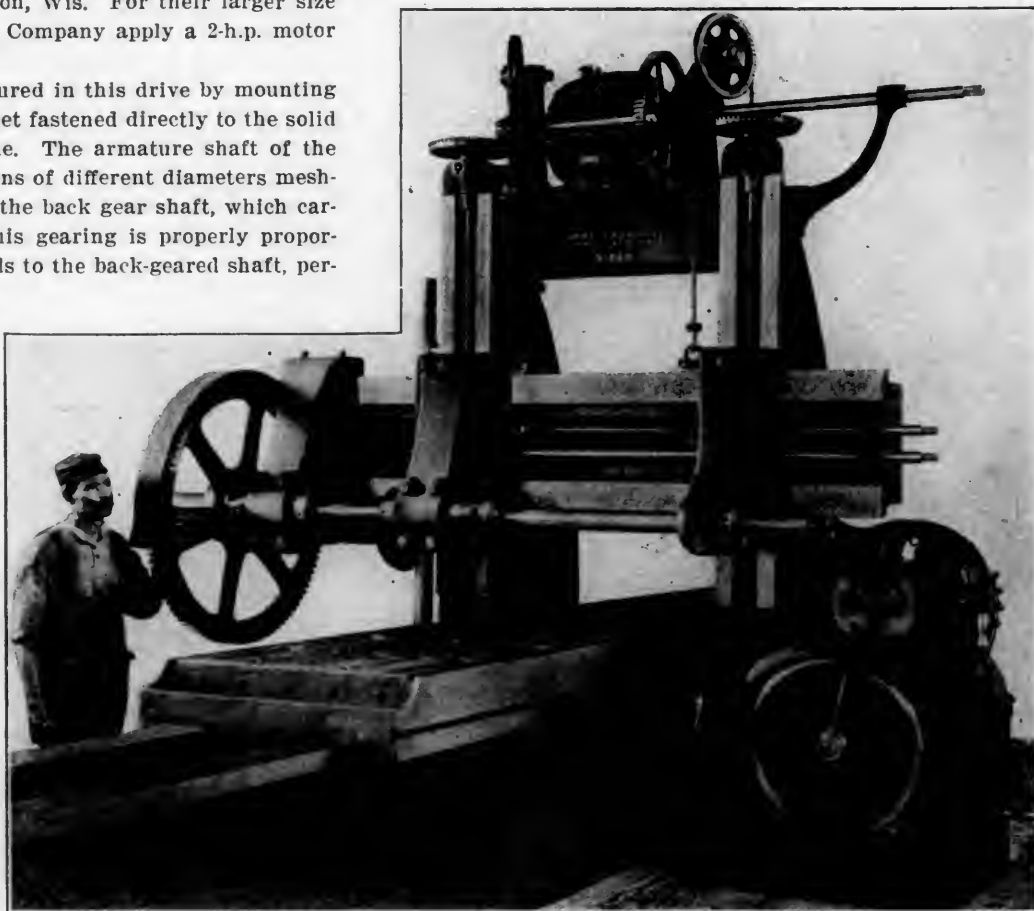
COMPLEX-DRIVE FOR A BEMENT-MILES SLAB MILLING MACHINE. WITH SEPARATE MOTORS FOR SPINDLE, TABLE FEEDS AND ELEVATING CROSS RAIL. GENERAL ELECTRIC MOTORS.
